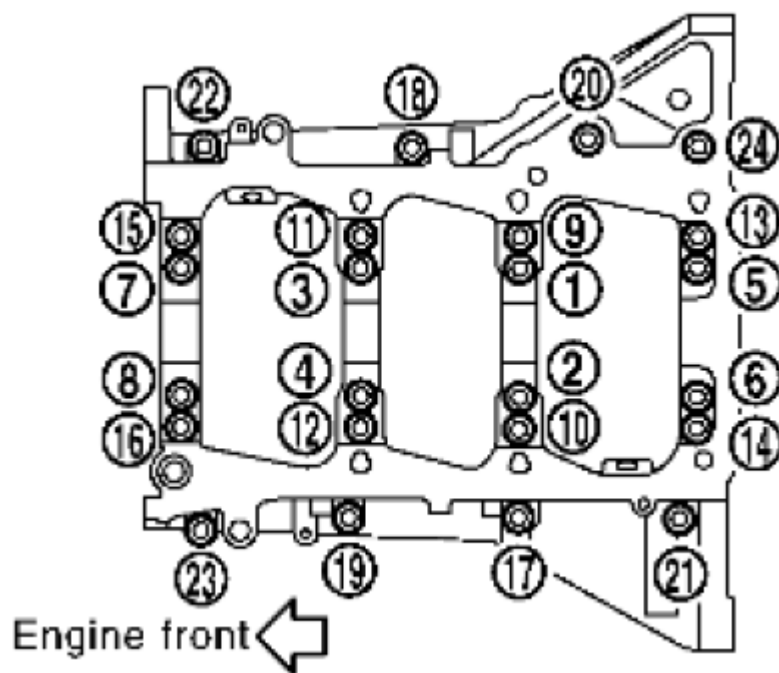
Identifying Lower Cylinder Block Bolts Tighten Sequence
